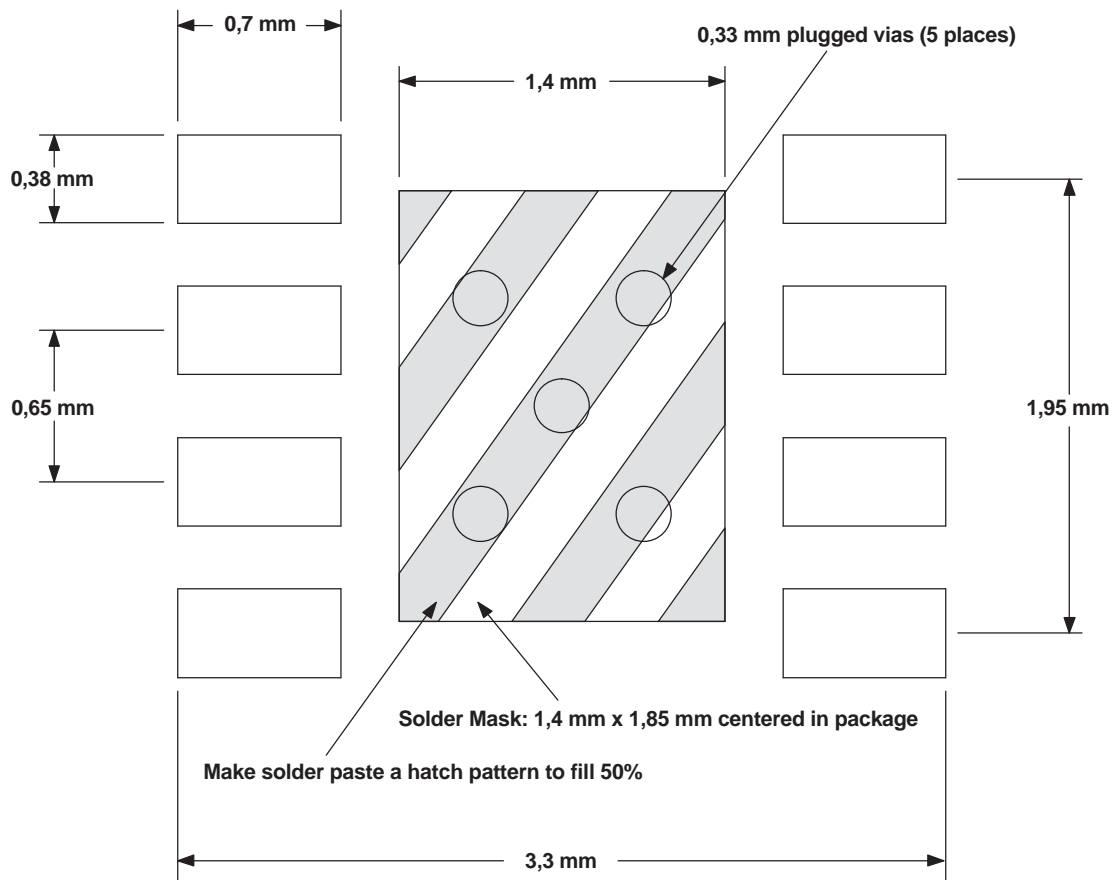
TPA2005D1 8-Pin QFN (DRB) Board Layout (Top View)
